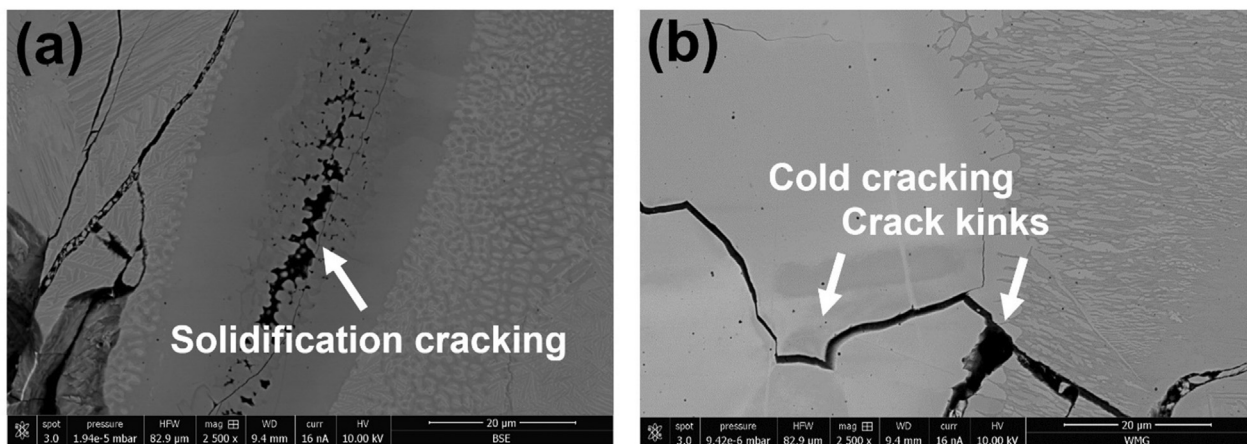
The two types of cracks observed in the keyhole melting weld pool (sample S1 used here): (a) solidification cracks, primary dendritic structure evident in micrograph which indicates that crack initiated at last stage of the solidification, (b) the majority of cracks are cold cracks, some of cracks may have initiated through solidification and later propagated at later stages through several grains or IMCs. Crack sizes are observed from a few microns to few mm in length. Note: In the current work, liquation type cracking has not been observed, which is through segregation of elements on grain boundaries.
